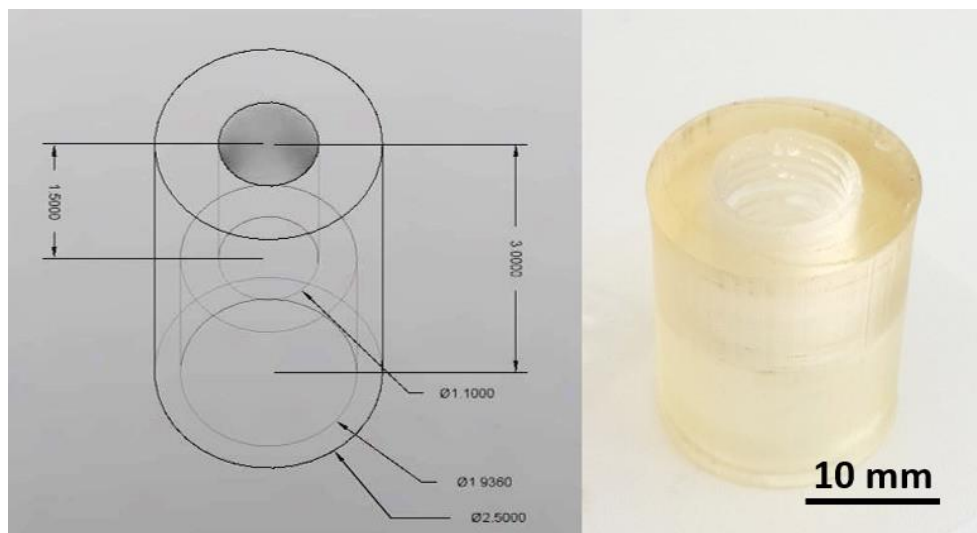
CAD design of a bursting pressure test device (left) and a 3D-printed implementation of this design with a contact area of 25mm^2 (right)
